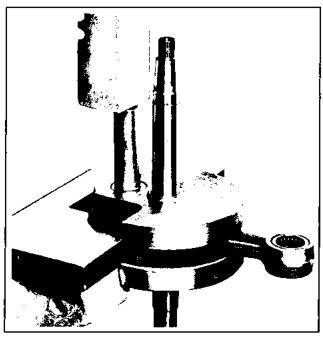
E-68. Pressing Crank Pin from Circuit Breaker Side Crankshaft
